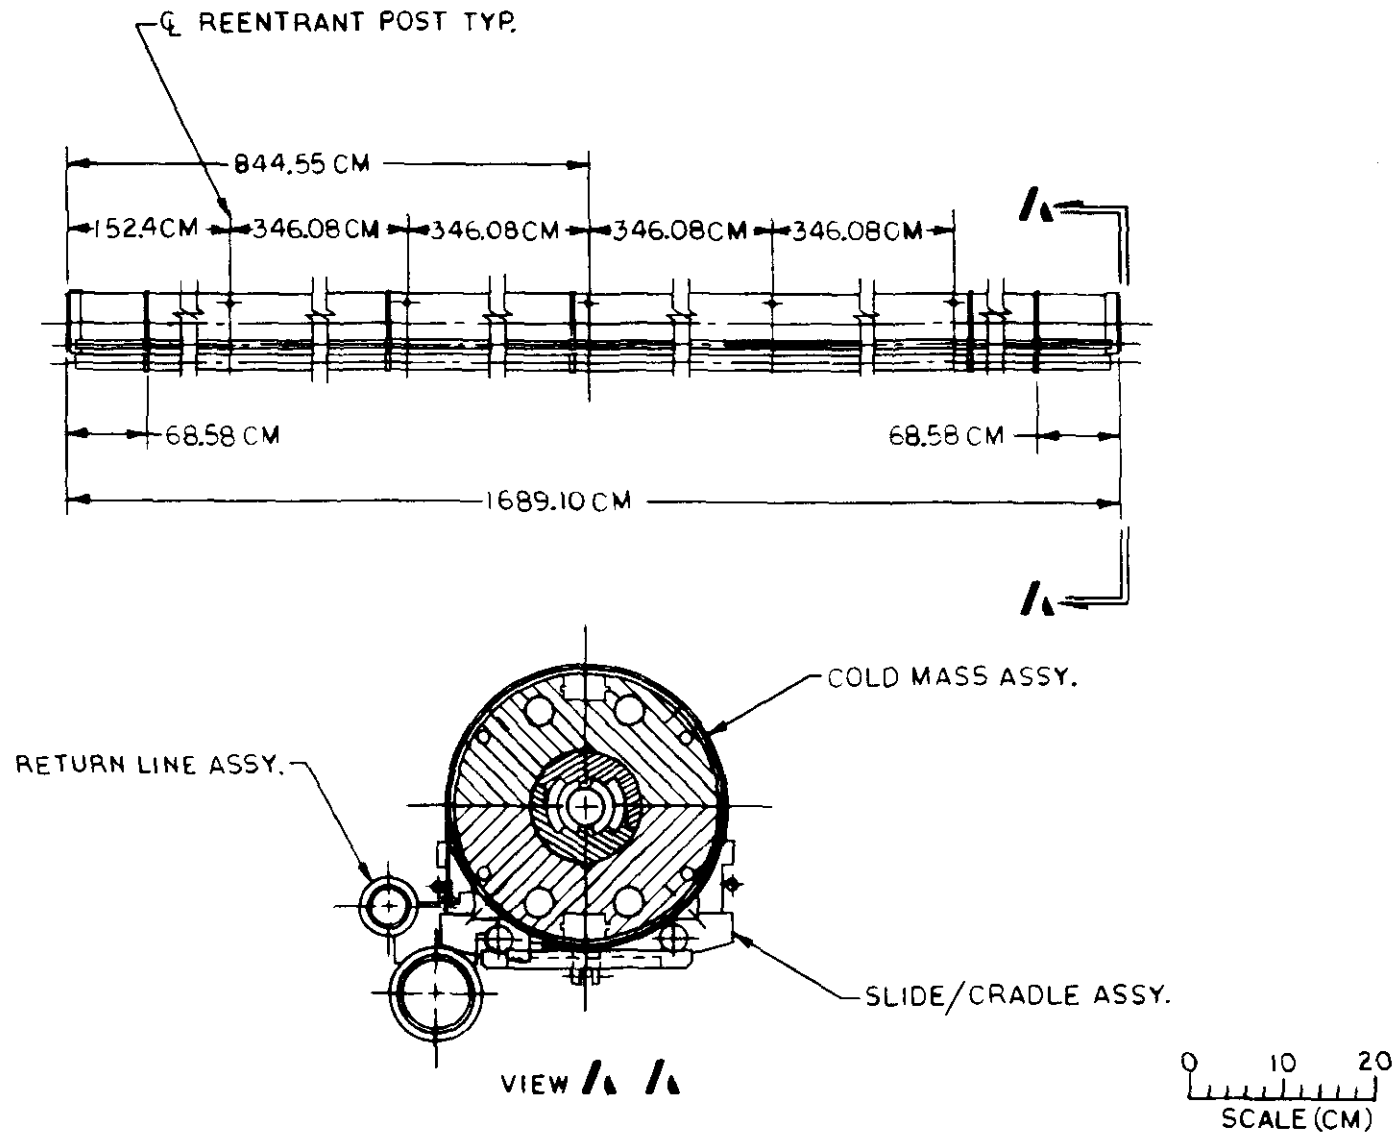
Cold mass subassembly, including dipole magnet in helium containment shell, helium return pipes, and slide assembly.
